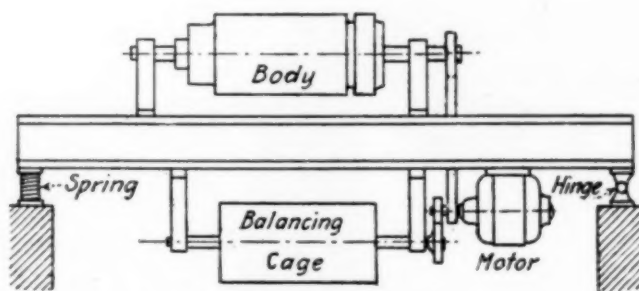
PRINCIPLE OF DYNAMIC BALANCING MACHINE
